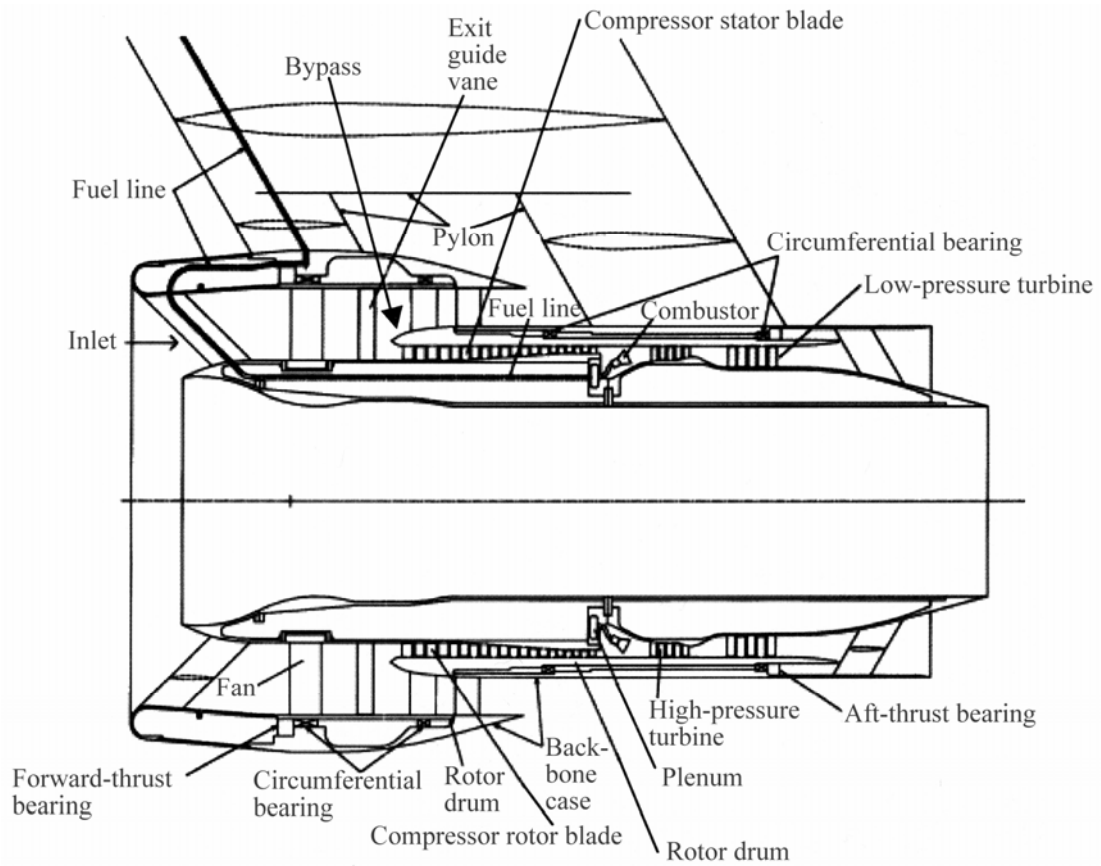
Longitudinal section of assembled exoskeletal engine.
